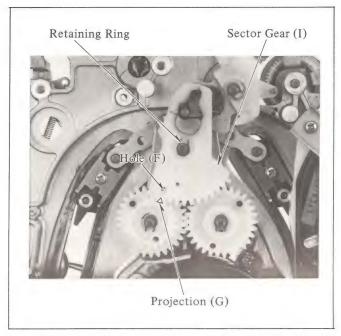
Assembly and Adjustment of Gears and Rods-(4)
